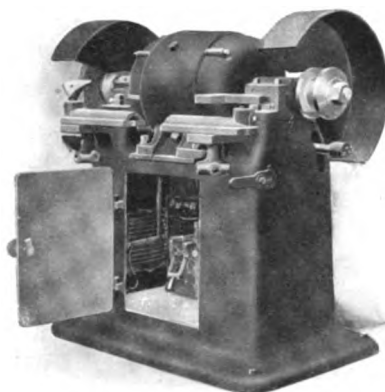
Motor Driven Dry Grinding Machine (Direct Current)
